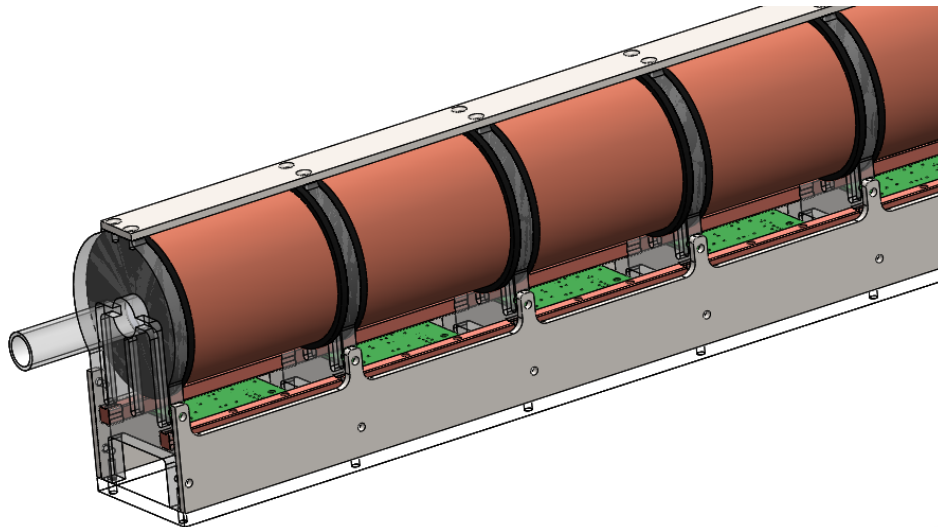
Representative portion of barrel subassembly showing barrel, separators, top plate, side plates, and coils.
